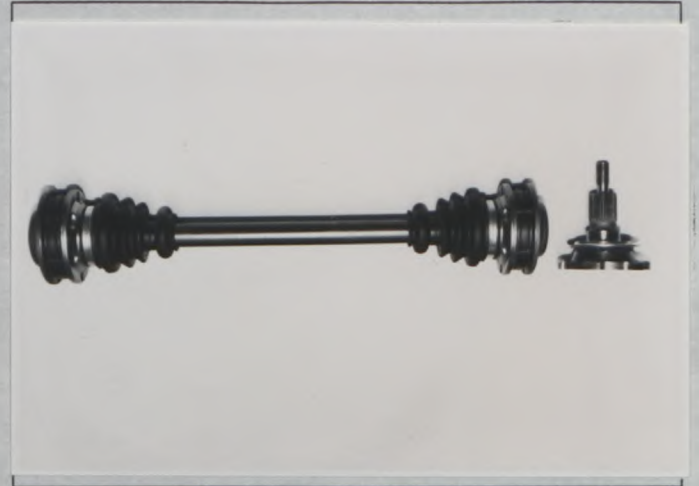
REINFORCED DRIVESHAFT, REAR TYPE B
